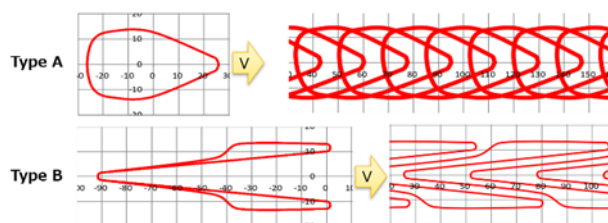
Various laser welding patterns obtained by moving repeated laser pattern
